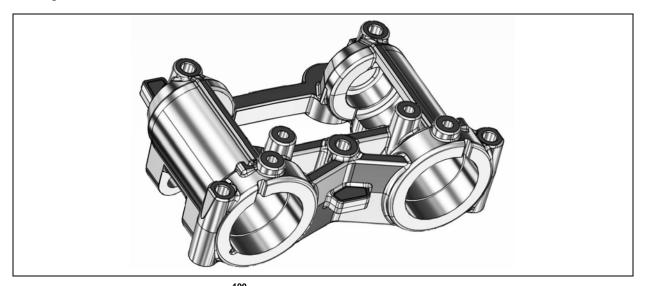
Camshaft Carrier (XY150)¹⁹⁰
